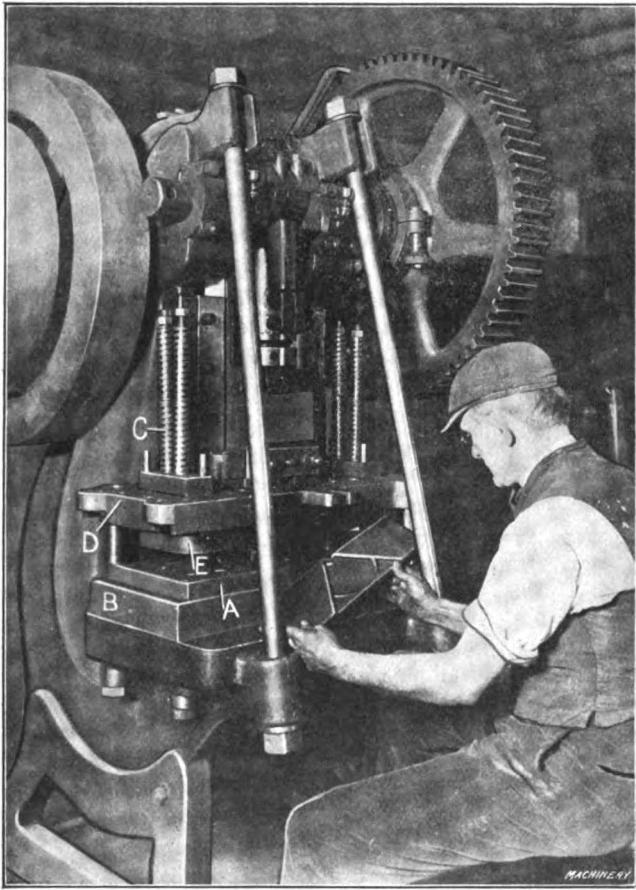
No. 4 Rockford Geared Punch Press used in producing the Sheet-steel Miter-box shown in Fig. 1, set-up for drawing up the Sides of the Frame
